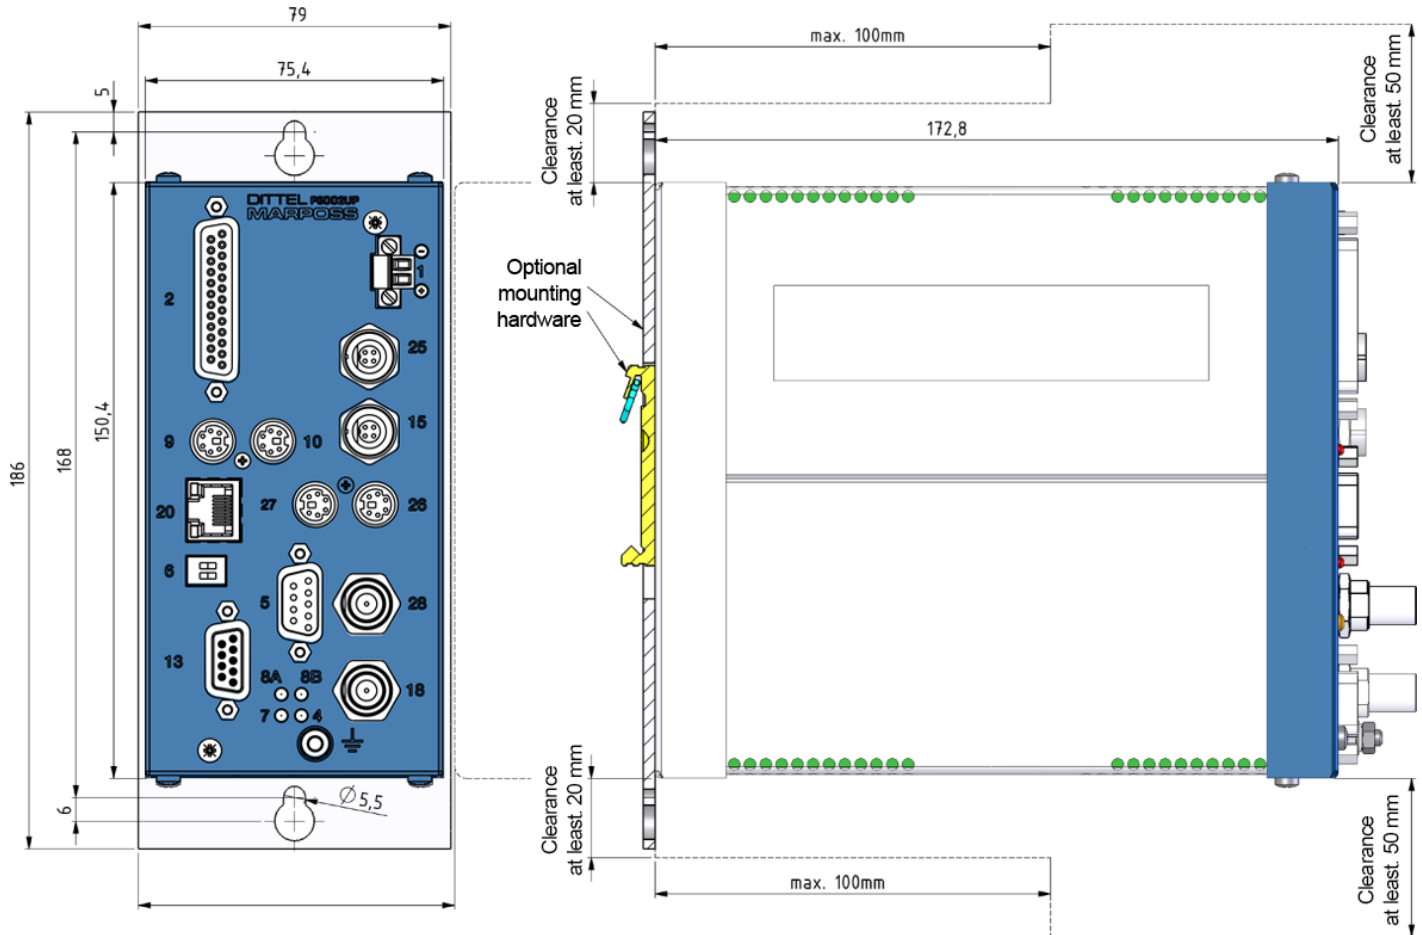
Example of P6002 UP line module mounting on vertical surface or on DIN guide
